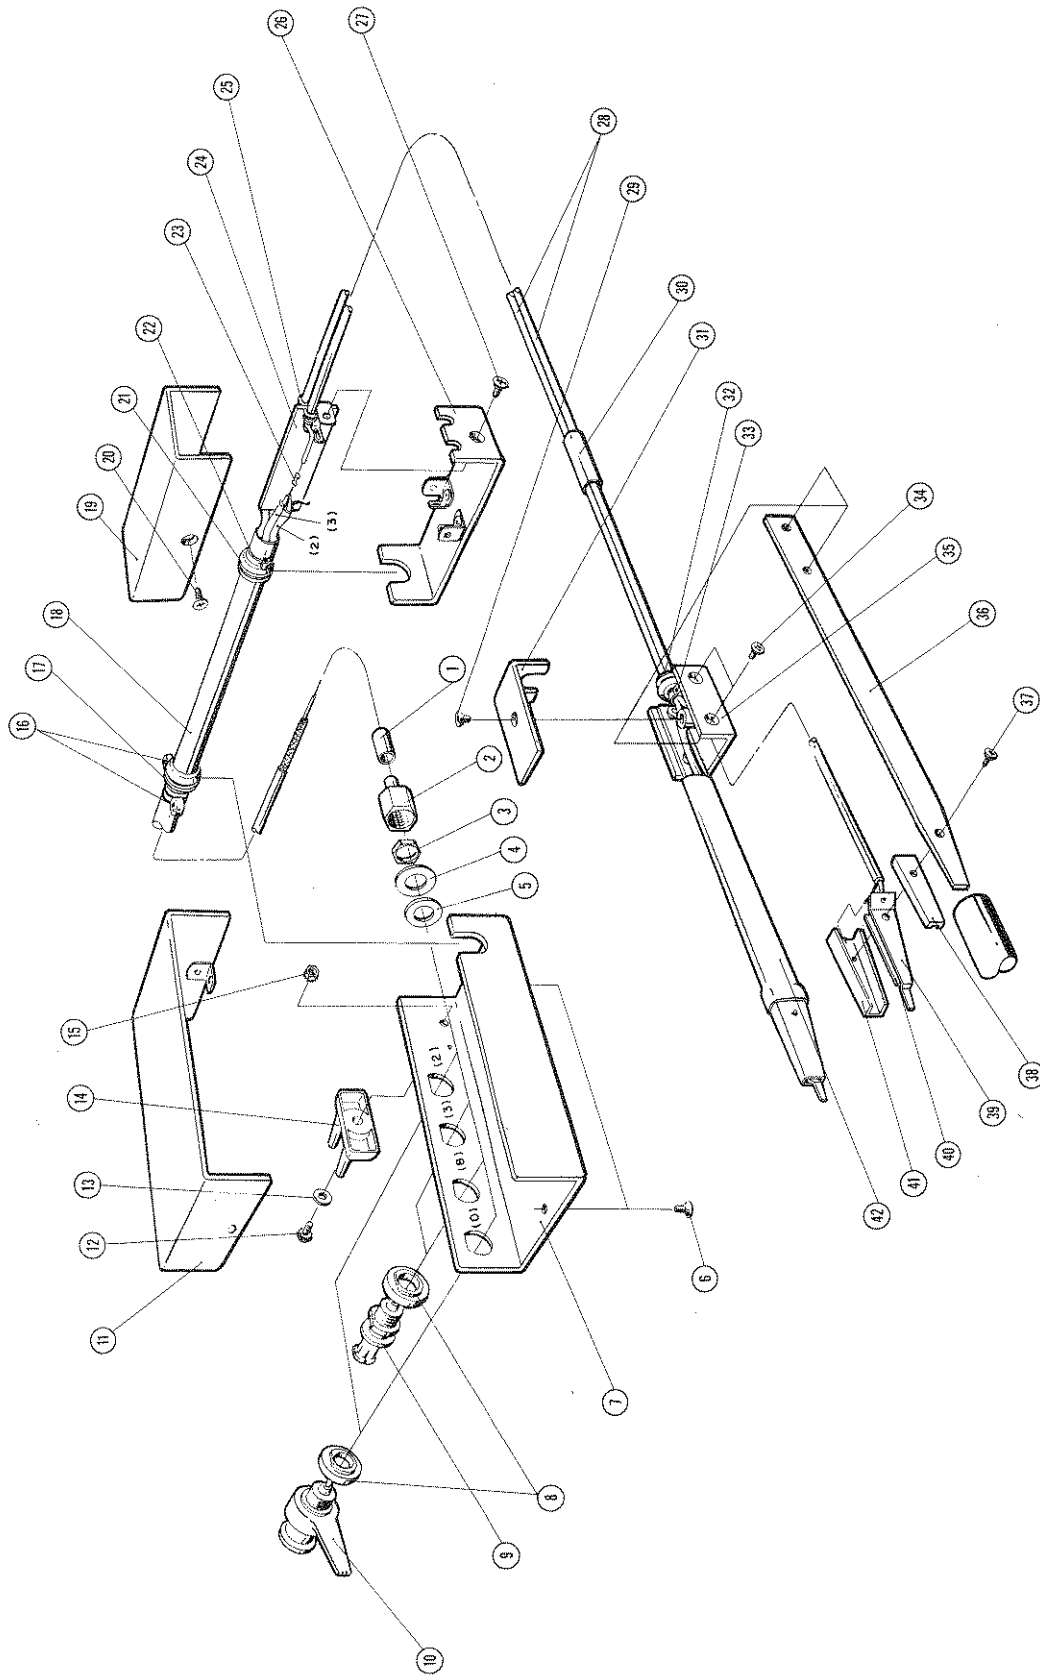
Parts Identification for 16034B (Sheet 1 of 2).
